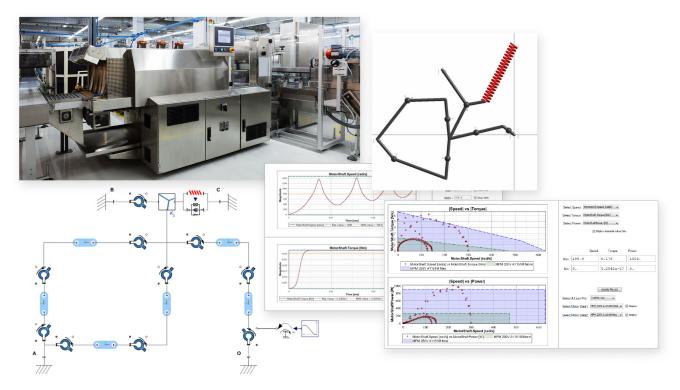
Servo-actuator sizing tool for complex manufacturing machine
